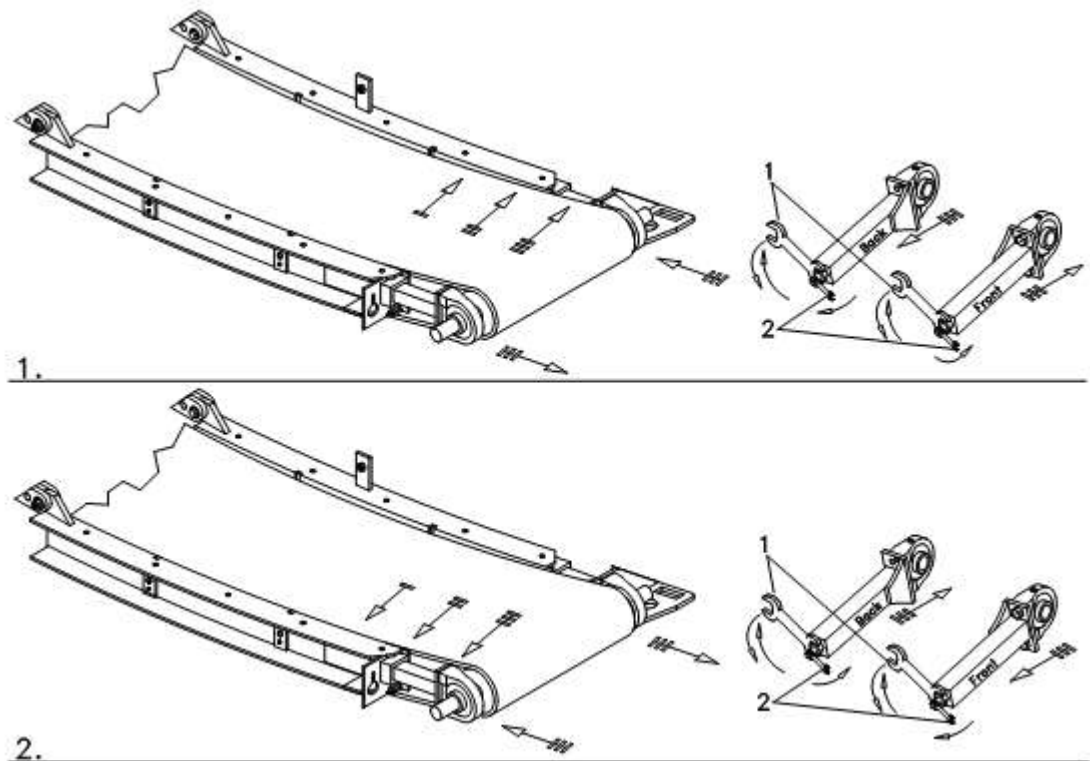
Conveyor Belt Adjustment (Mini Padder Shown)
